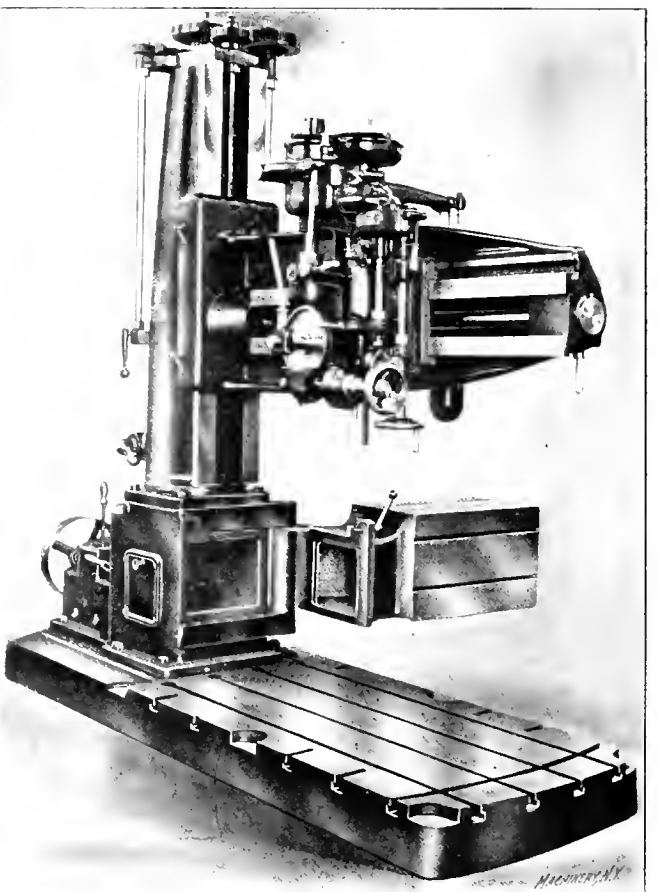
Dresdner Bohrmaschinenfabrik Radial Drill, with Hinged Table.
